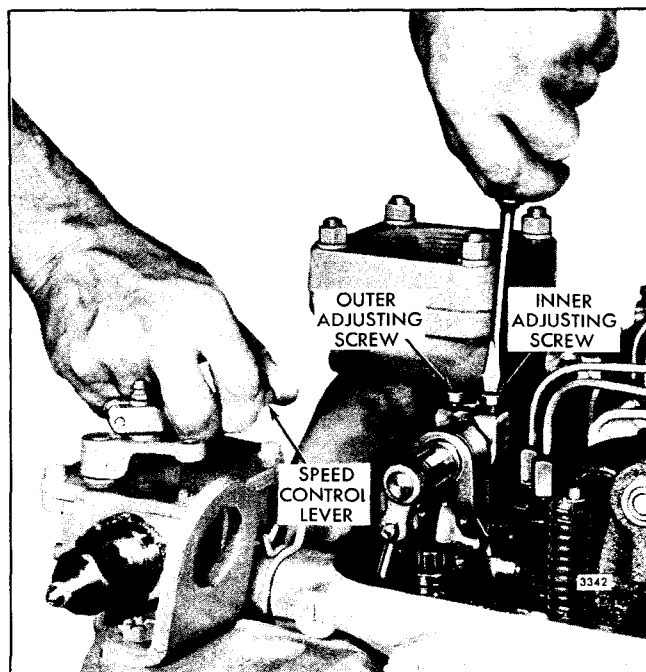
Positioning the Rear Injector Rack Control Lever
